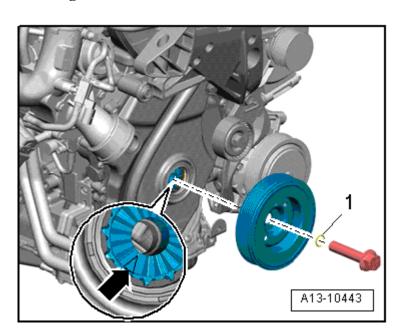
Identifying O-Ring And Tooth Contour Courtesy of AUDI OF AMERICA, LLC
